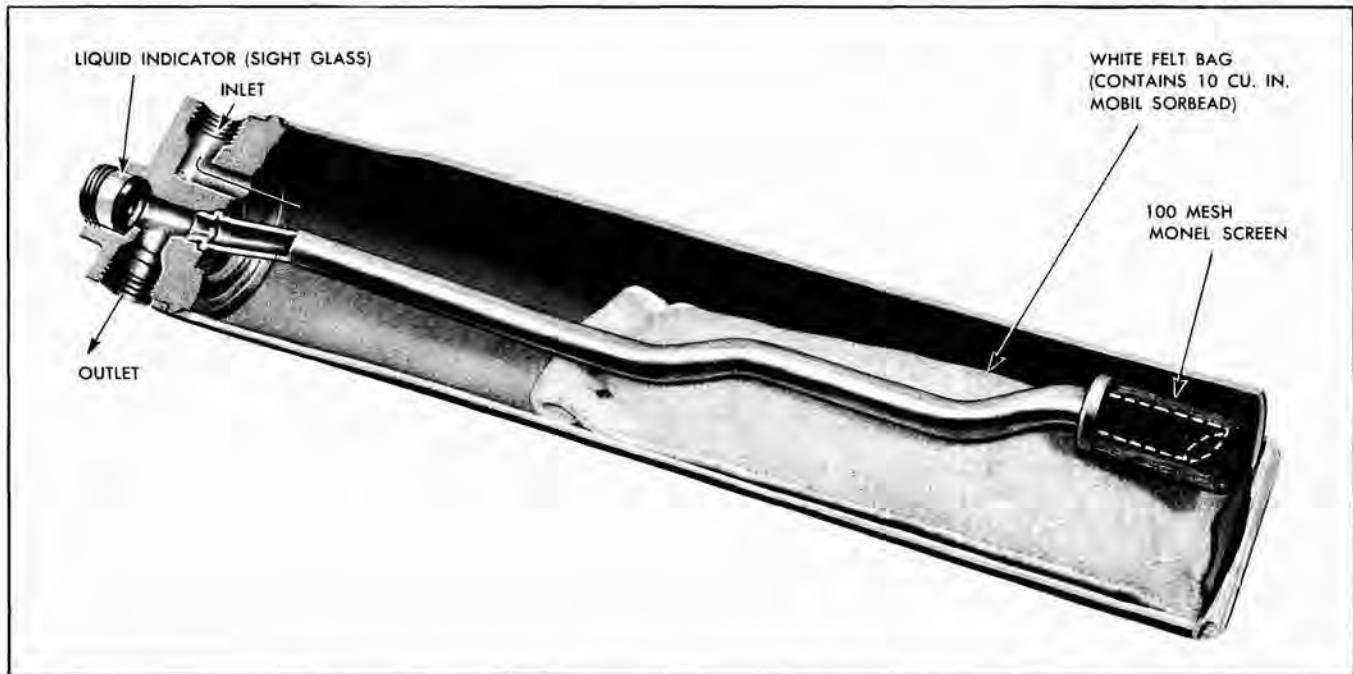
Inside View of Receiver and Liquid Indicator Assembly
